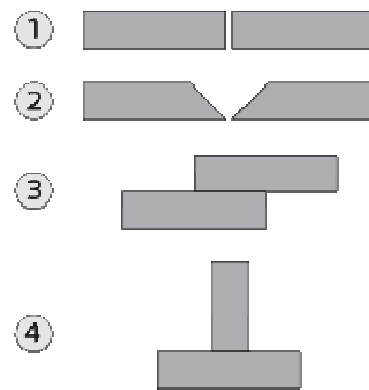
Common welding joint types – (1) Square butt joint, (2) V butt joint, (3) Lap joint, (4) T-joint
